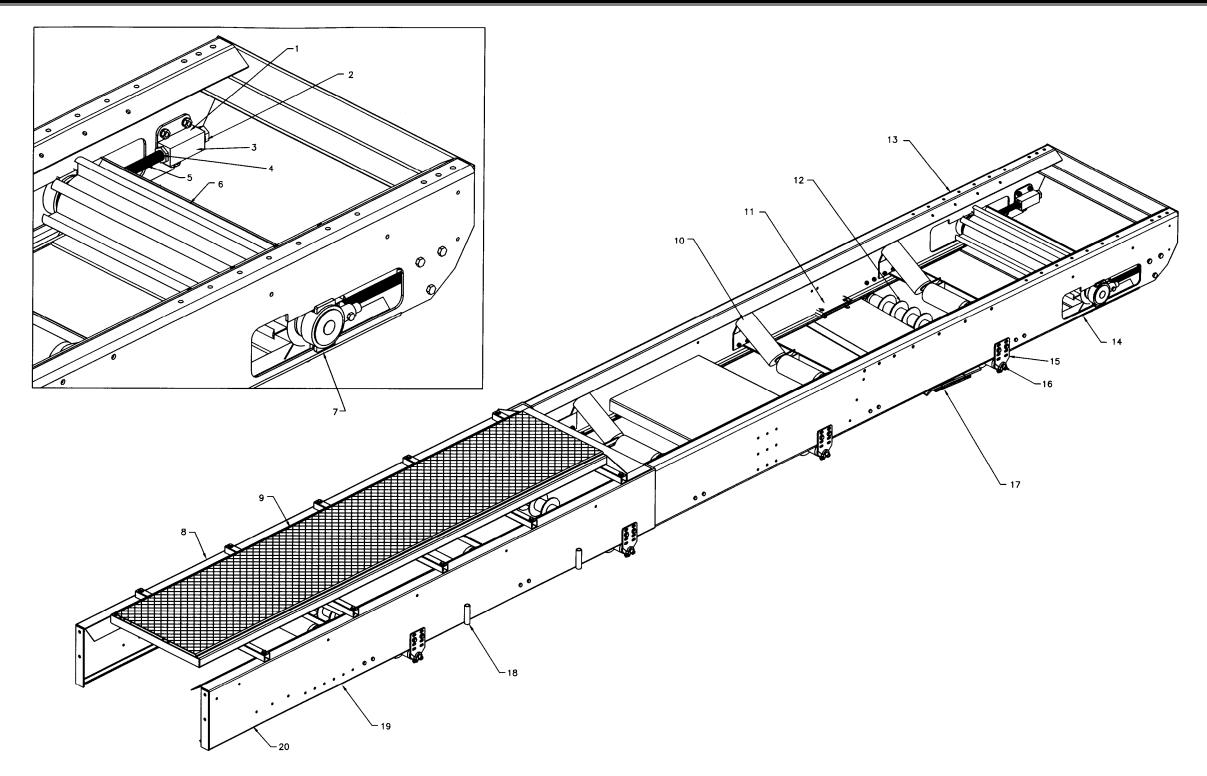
Conveyor Assembly Left-Hand and Right-Hand
